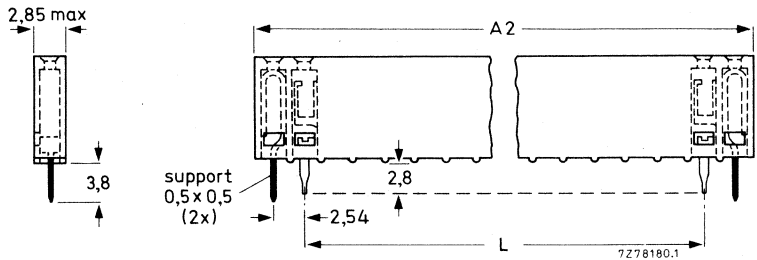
Panel socket, single row. Dimensions are identical with those in Fig. 5 except as shown. See Table 2 for dimensions A2 and L.
